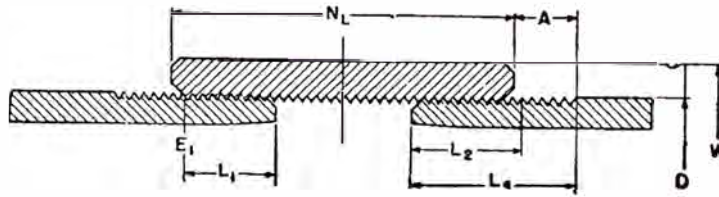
Dimensions of Hand Tight Assembly for Use with Table X3.2
